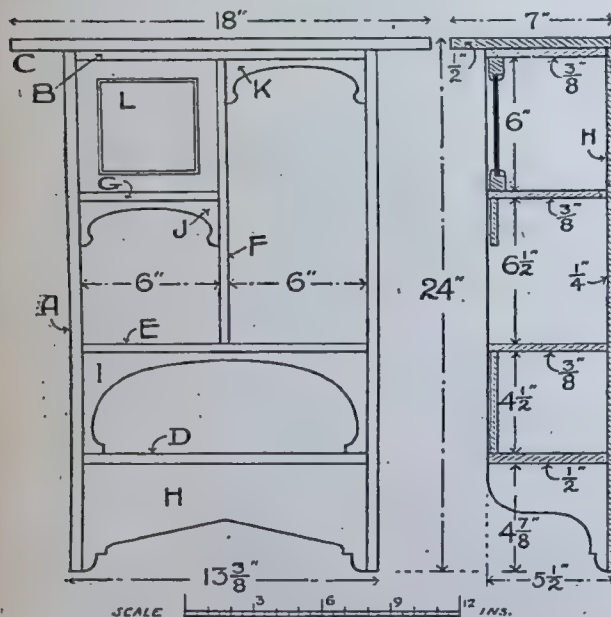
WALL CABINET. FIG. 3. ELEVATION AND SECTION.
